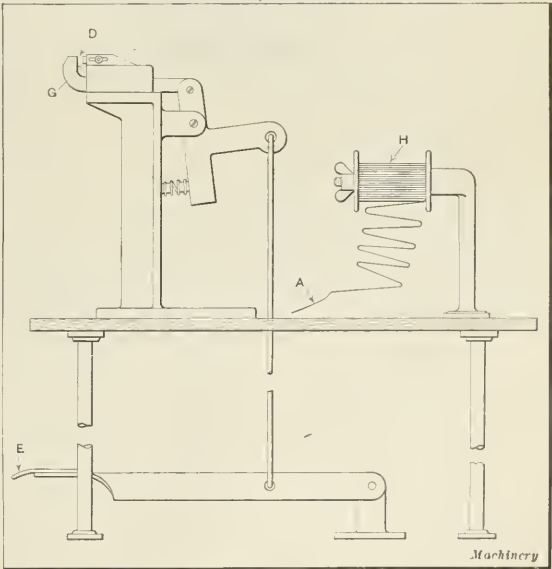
Fixture for clamping Zigzag Filament to Lead-in Wires
